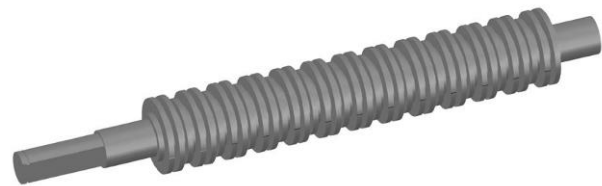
Isometric view of the 2 mm flat noodles cutting shaft
